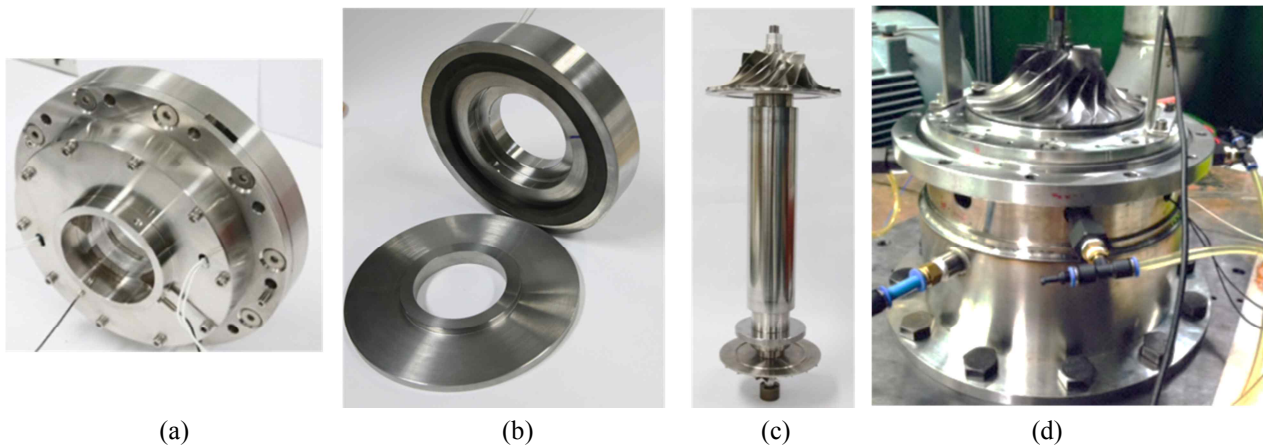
Manufactured components. (a) Radial magnetic bearing, (b) Thrust magnetic bearing, (c) Rotor with impellers, (d) Assembled turbo compressor
